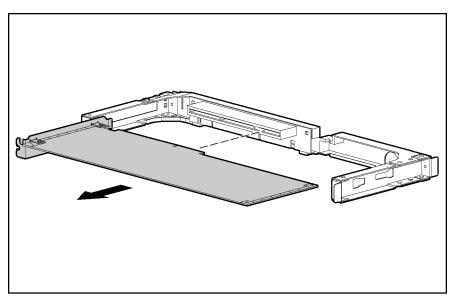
Removing an expansion board from the PCI riser board assembly
